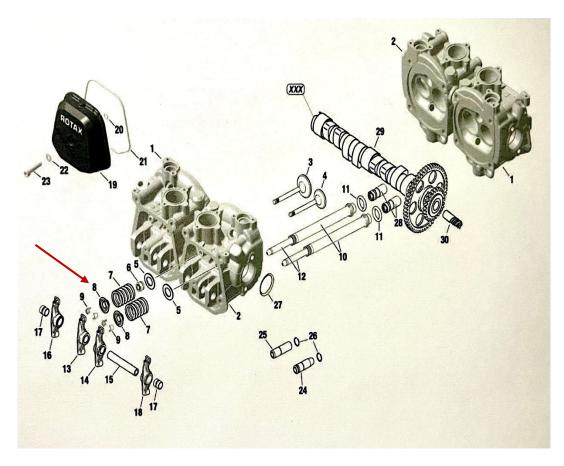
Engine cylinder head and valve components. (Source: Rotax 914 Illustrated Parts Catalogue, Chapter 72-20-00)
